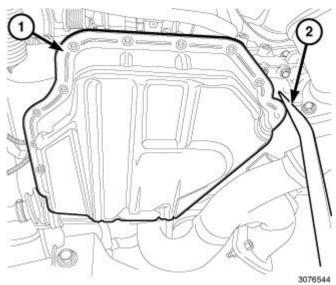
Using Pry Bar To Remove Oil Pan Courtesy of CHRYSLER GROUP, LLC
